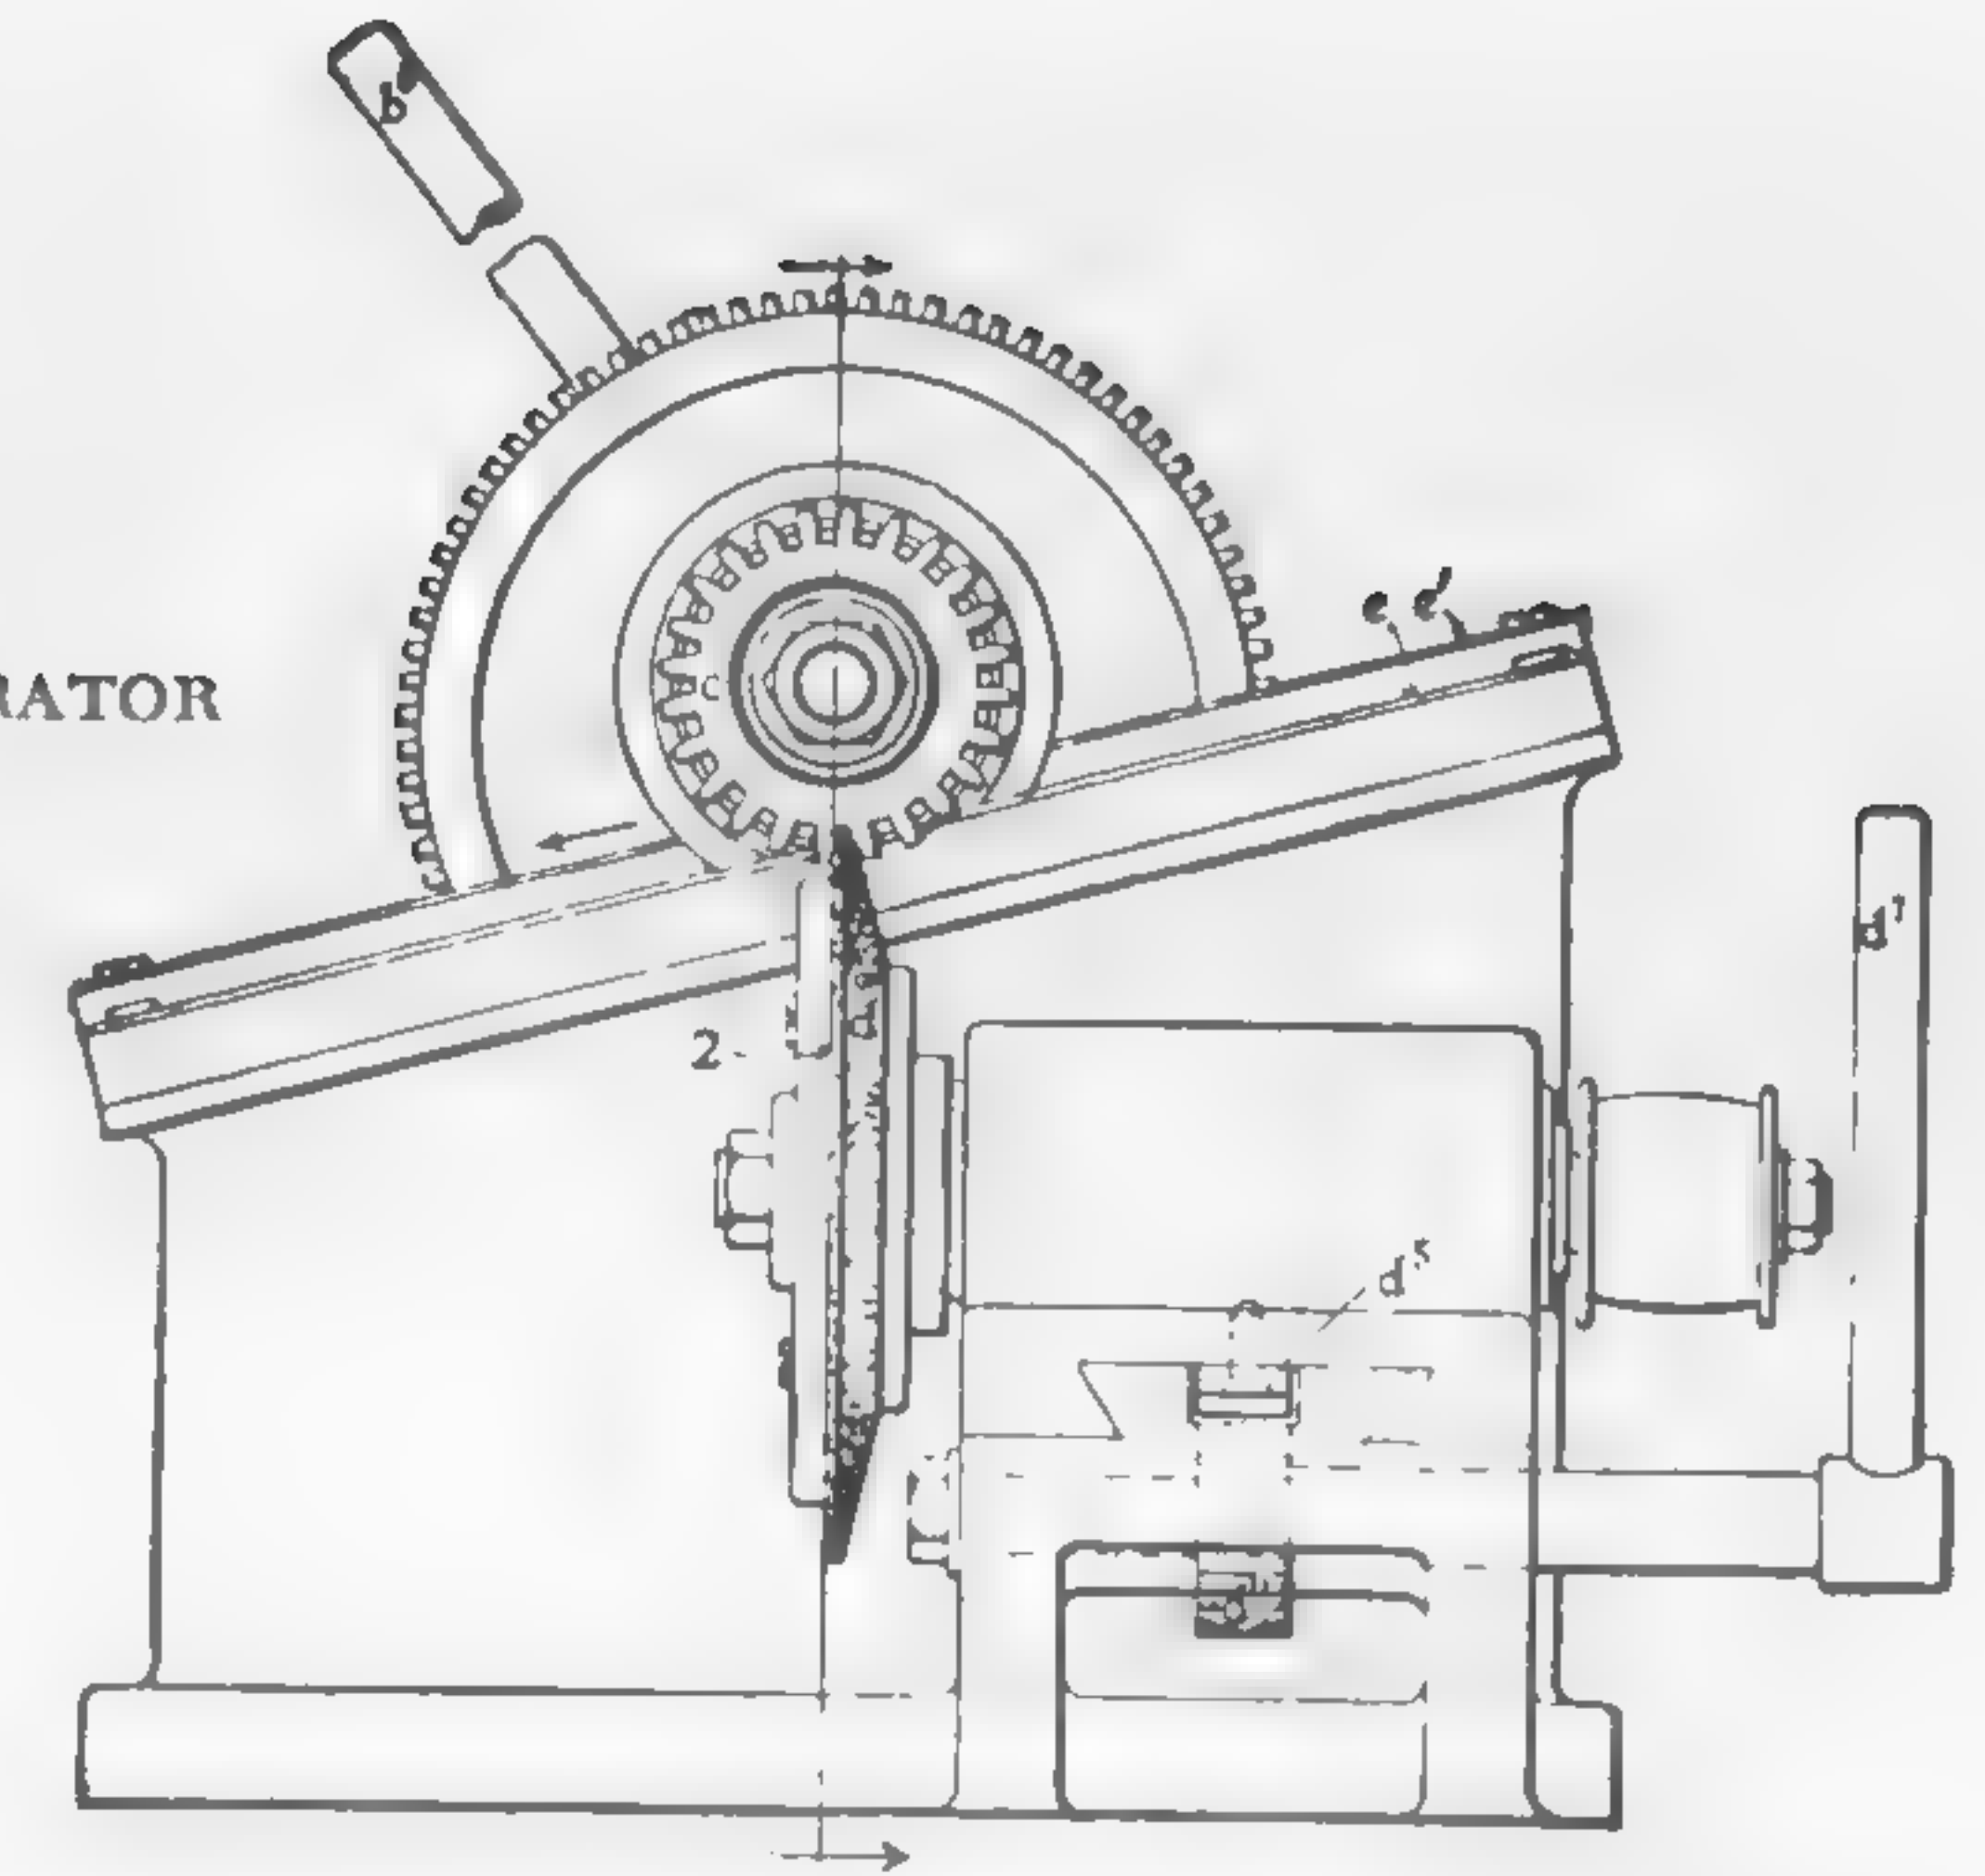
A. THE FELLOWS GEAR SHAPER (*American Machinist*)
